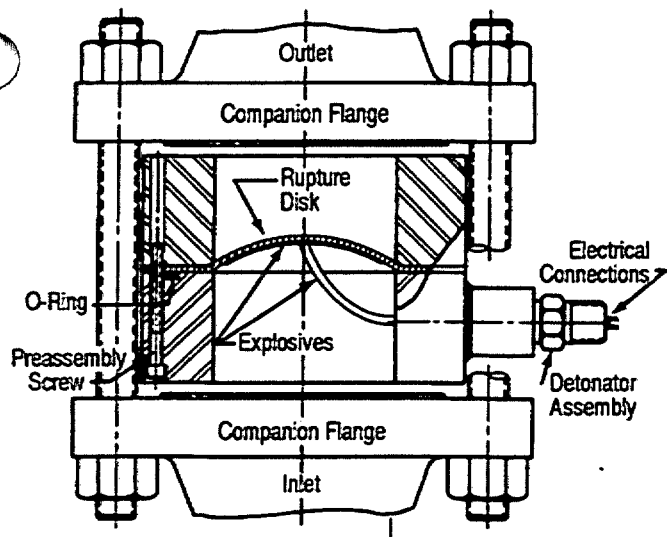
Protractor Valve Schematic (Ref. 82)
